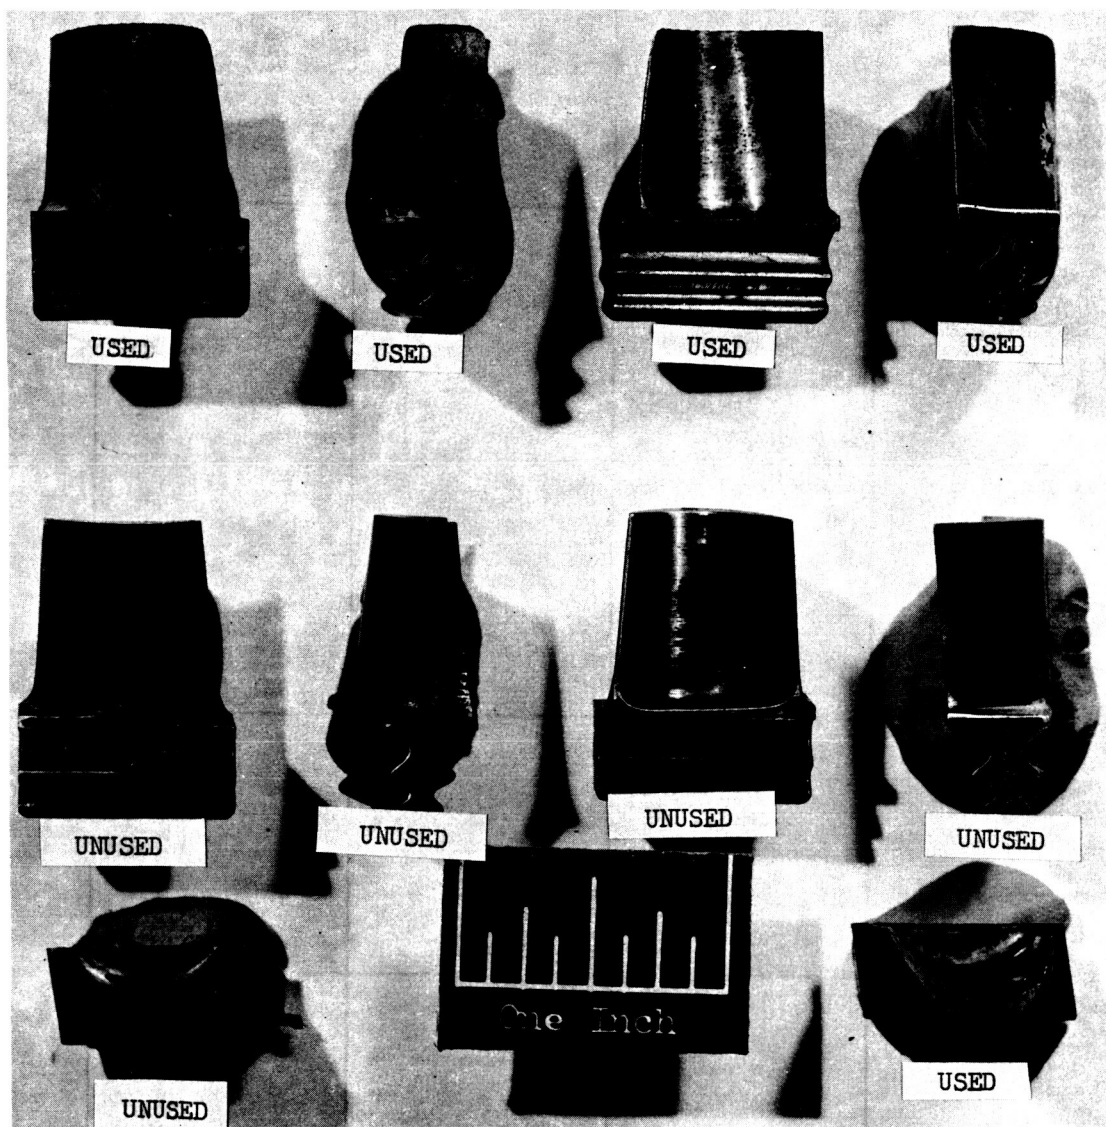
Cold Flow Stage 3 Turbine Buckets Compared to Unused Buckets to Show Surface Pitting and Other Damage.
